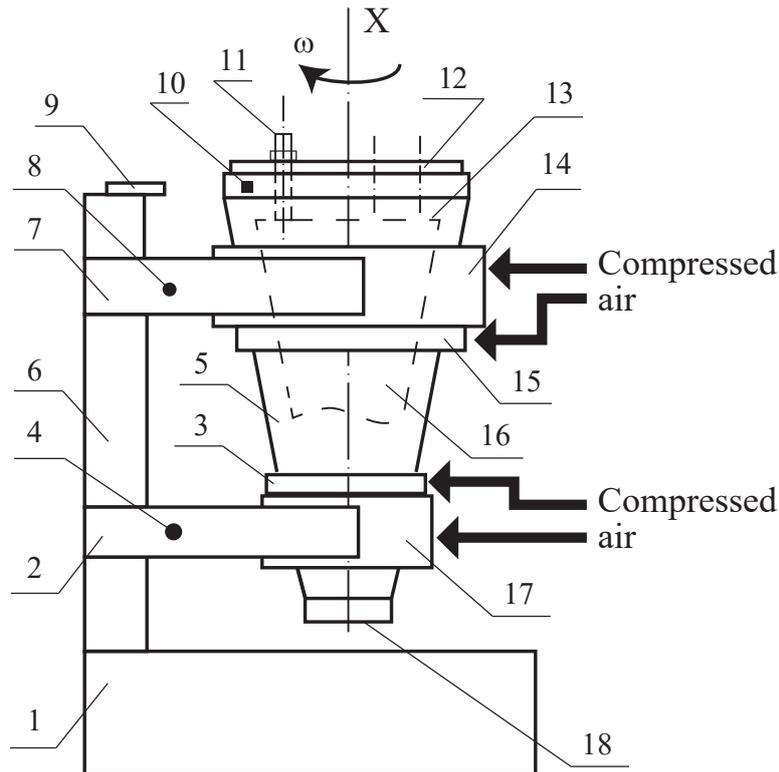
Diagram of balancing test bench: 1 – base; 2 – lower oscillating suspension; 3 – pneumatic rotor braking mechanism; 4 – force sensor “low”; 5 – service adapter; 6 – vertical stand; 7 – upper oscillating suspension; 8 – force sensor “up”; 9 – unbalance phase reference sensor; 10 – mirror reflector; 11 – retaining stud; 12 – profile cover; 13 – upper correction plane; 14 – upper gasostatic bearing; 15 – pneumatic actuator; 16 – tested AV; 17 – lower gasostatic bearing; 18 – lower correction plane
